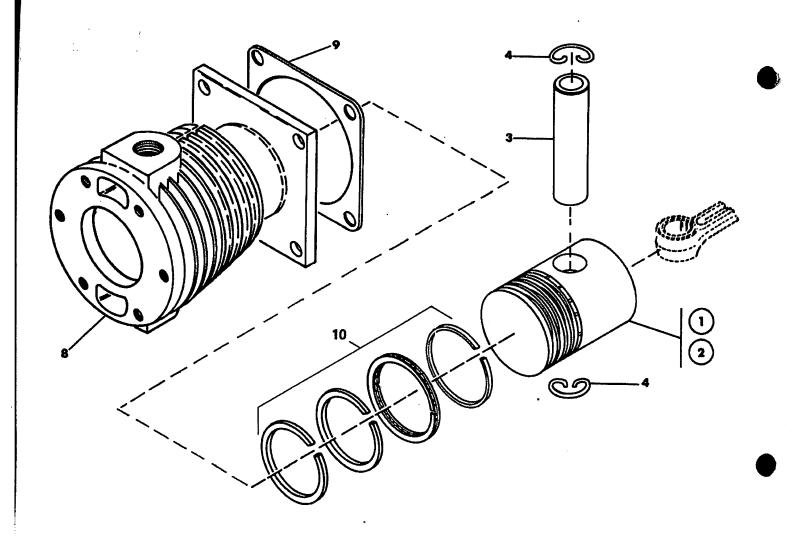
5 1/2 INCH DIAMÈTER PISTON AND CYLINDER ASSEMBLY
